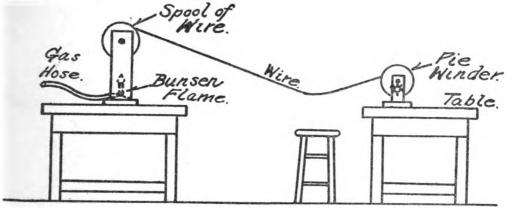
METHOD OF WINDING SECONDARY SECTIONS IN ORDER TO INSURE THE HIGHEST POSSIBLE INSULATION
